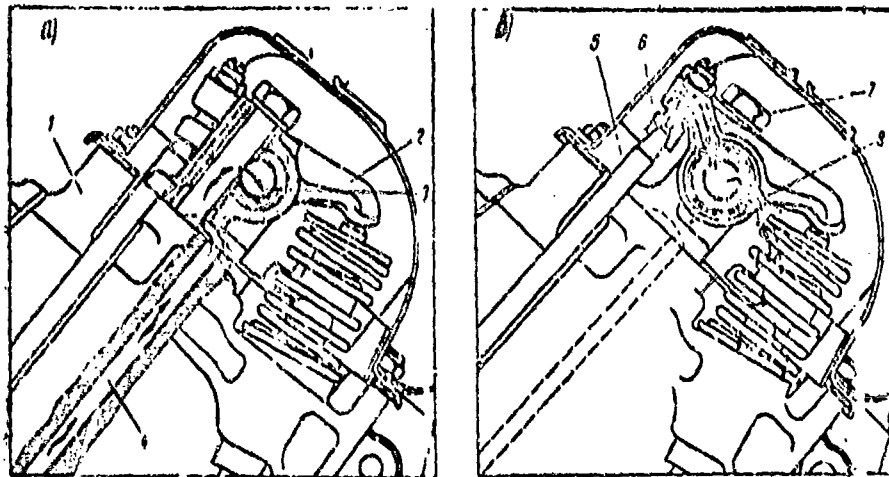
Schematic of rocker arm mechanism lubrication:
